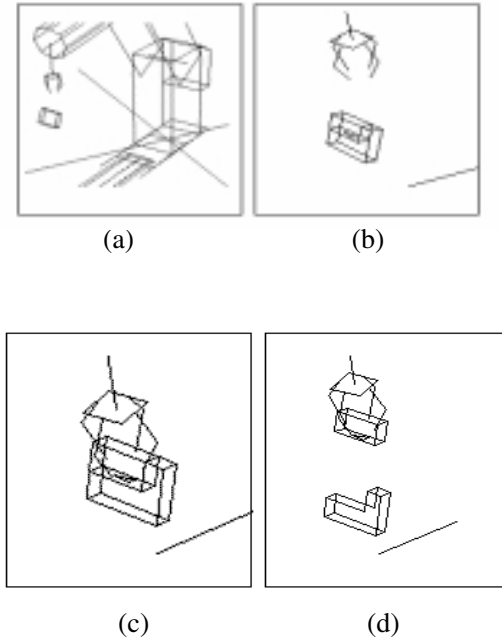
Disassembly sequence. (a) Overall view, (b) Approaching phase, (c) Disassembly in progress, (d) One of the parts is removed.
